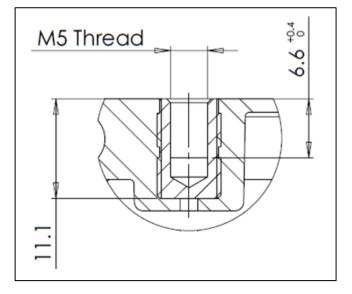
M-317 Back Panel Mounting Arm Screw Insert Dimensions
